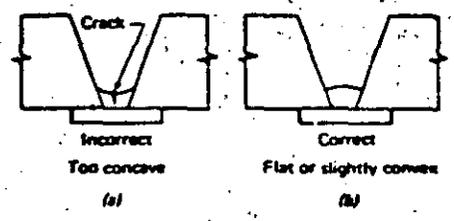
A concave root pass (a) may crack because tensile stresses exceed the strength of the weld metal. A slightly convex root-pass bead (b) helps prevent cracking.
